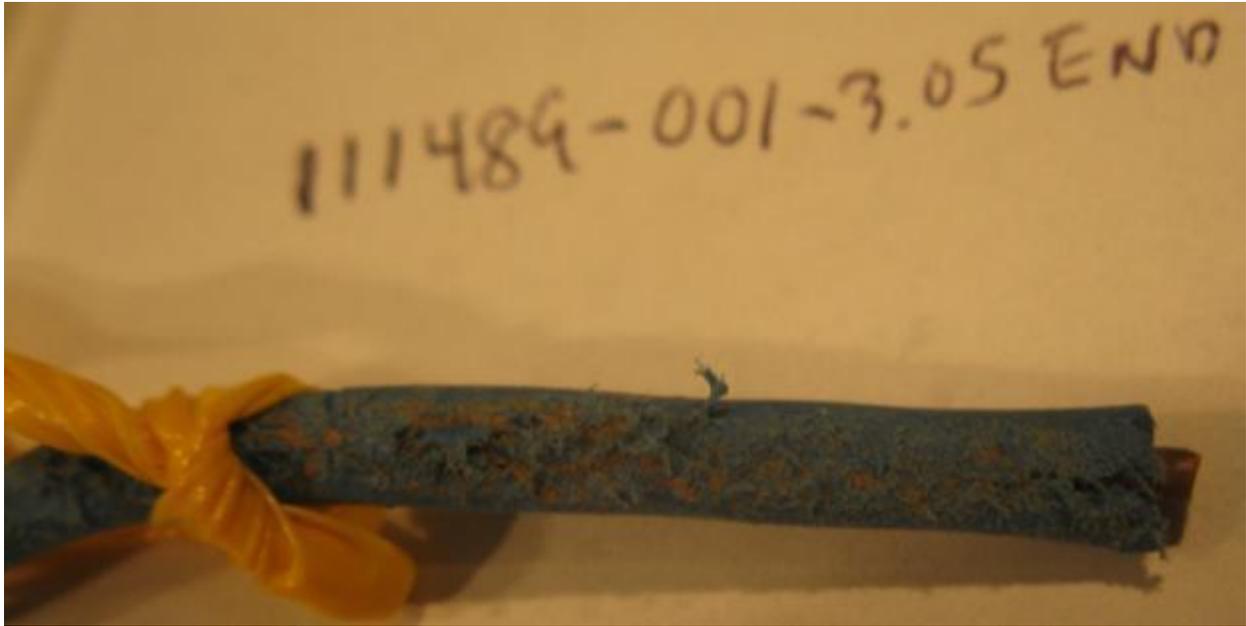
Break of Insulation Jacket (#4) on Field Tested Company A-12 AWG Solid Copper Wire
